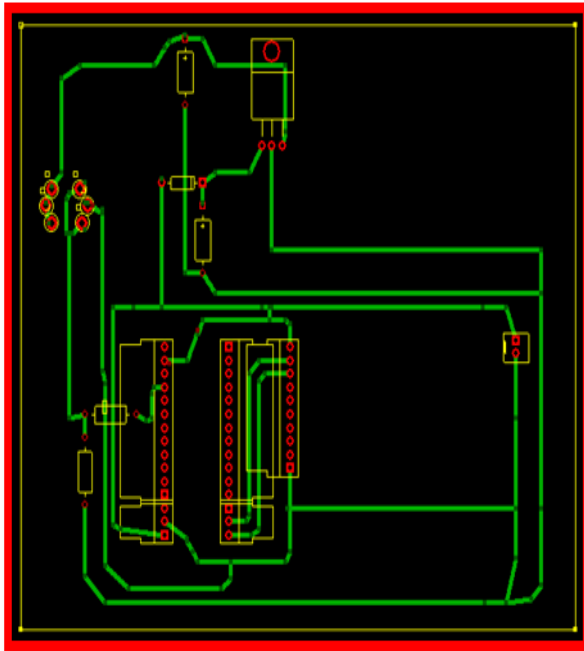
a) PCB layout of a wireless gas sensing system.
